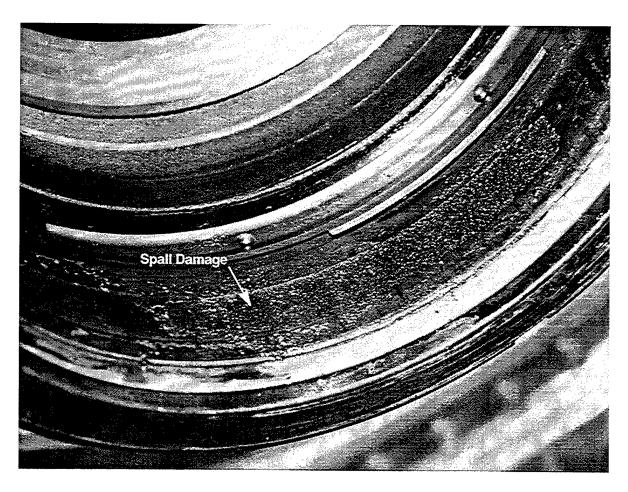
Photo of F110-GE-100 ESN 509-716/5 No. 4R Bearing Outer Race Spall.
